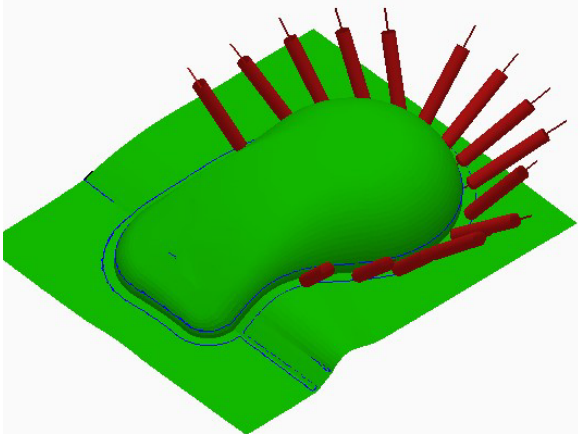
Pencil-cut tool path (dark blue lines) identified on a mouse surface model
